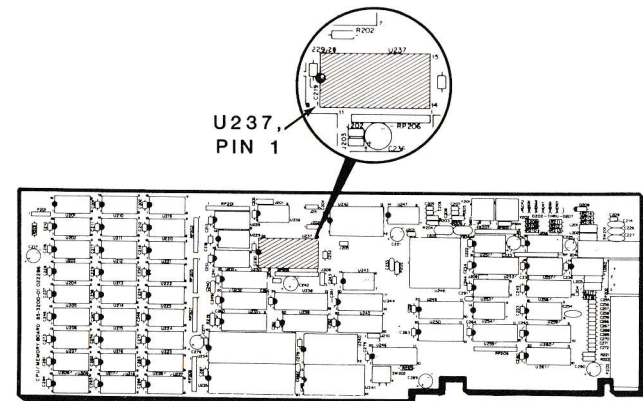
CPU/Memory Card (PCB Part No. 85-3162-XX)
